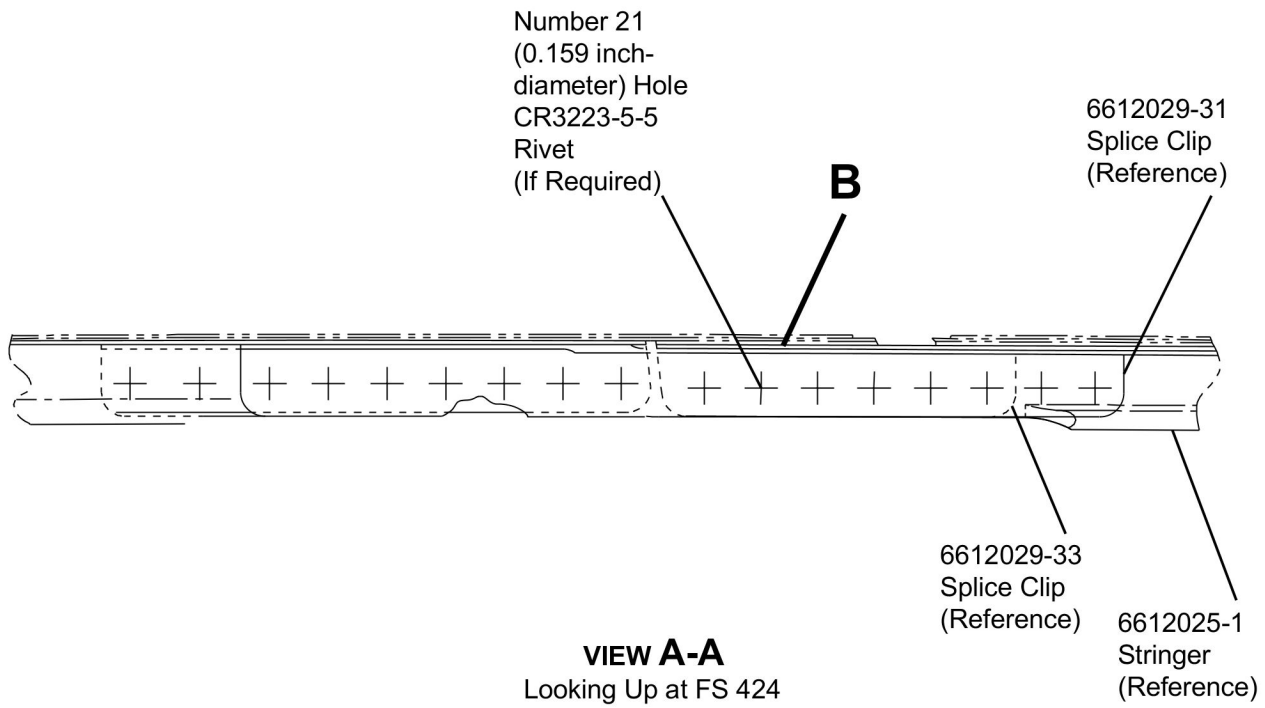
Rivet Inspection/Replacement (Sheet 1)
